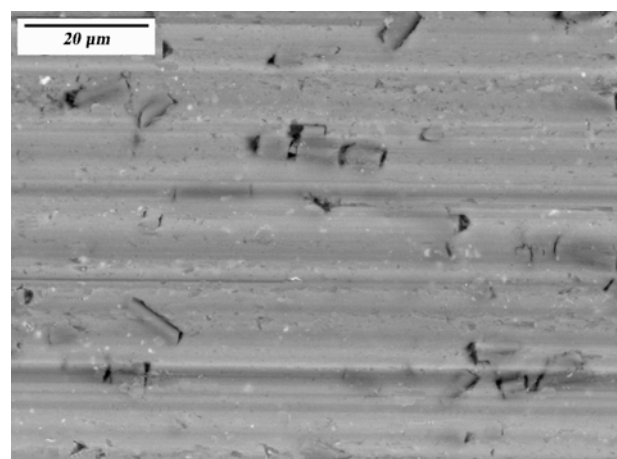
Machined surface of the aluminium composite (cutting parameters: $v_c = 1200$ m/min, $f = 0.08$ mm/rev)
